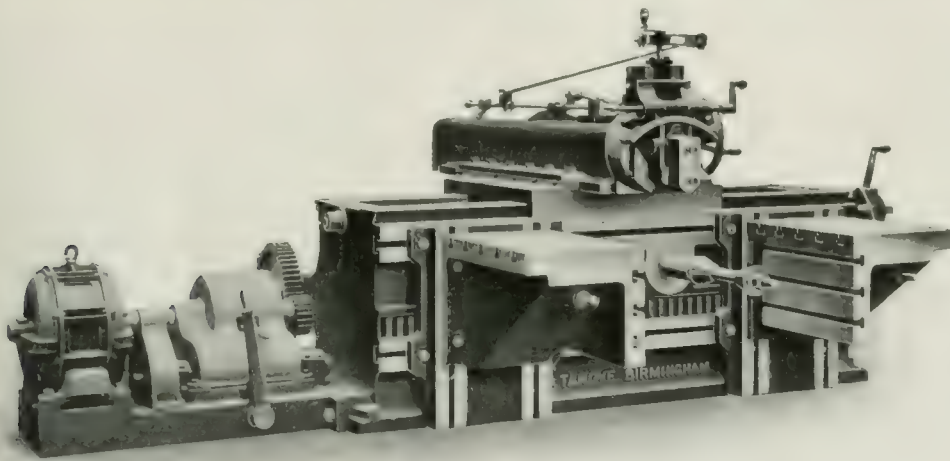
Horizontal Planing Machine driven by A.C. Motor.
